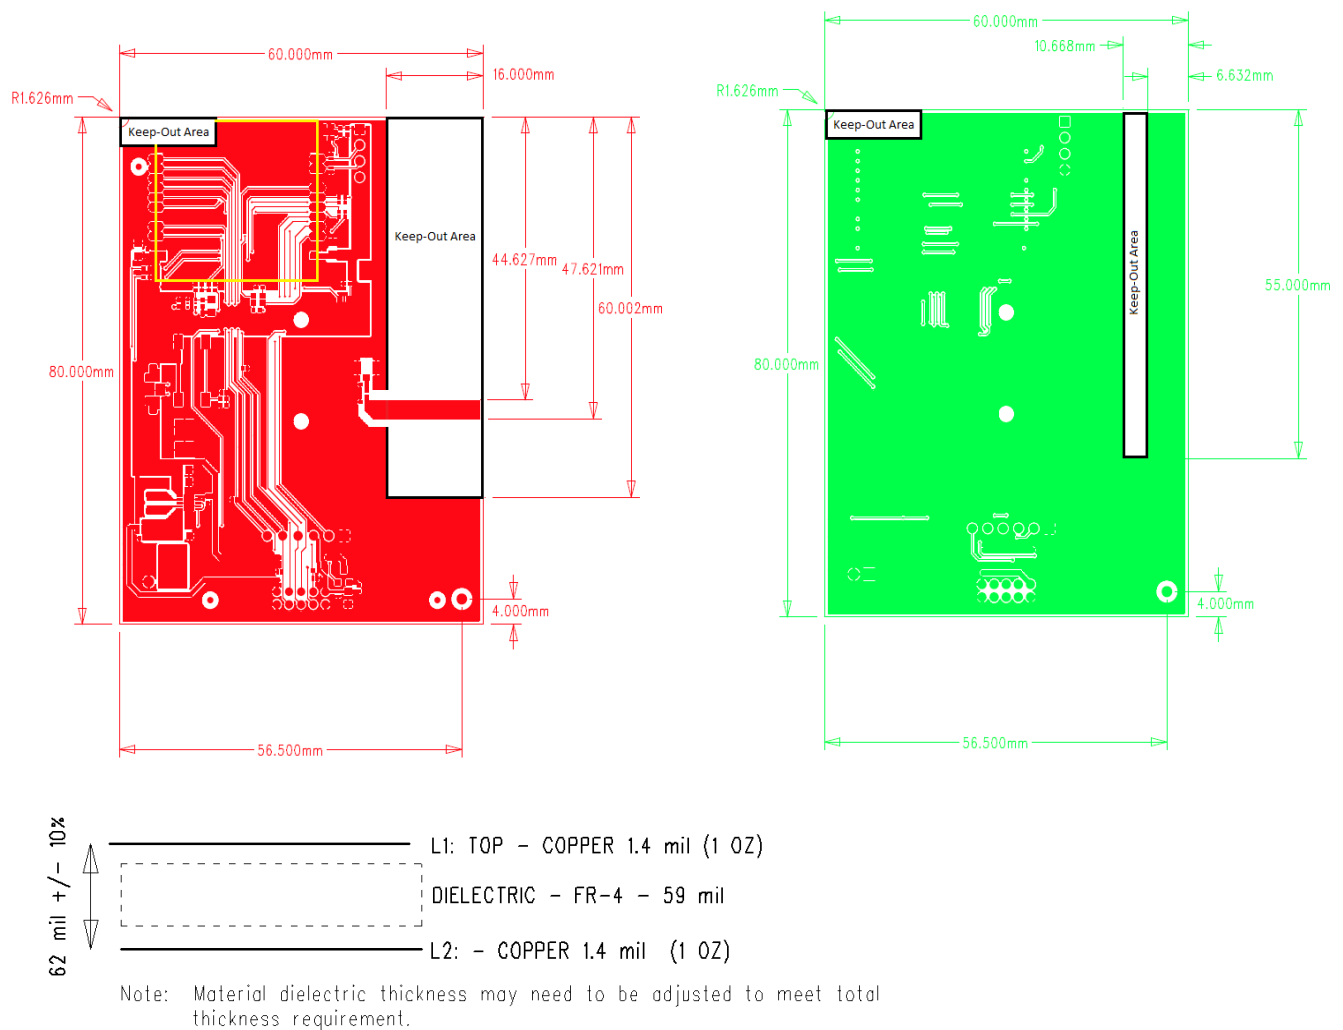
PCB Notch Antenna Reference Design PCB (Front and Back View)
